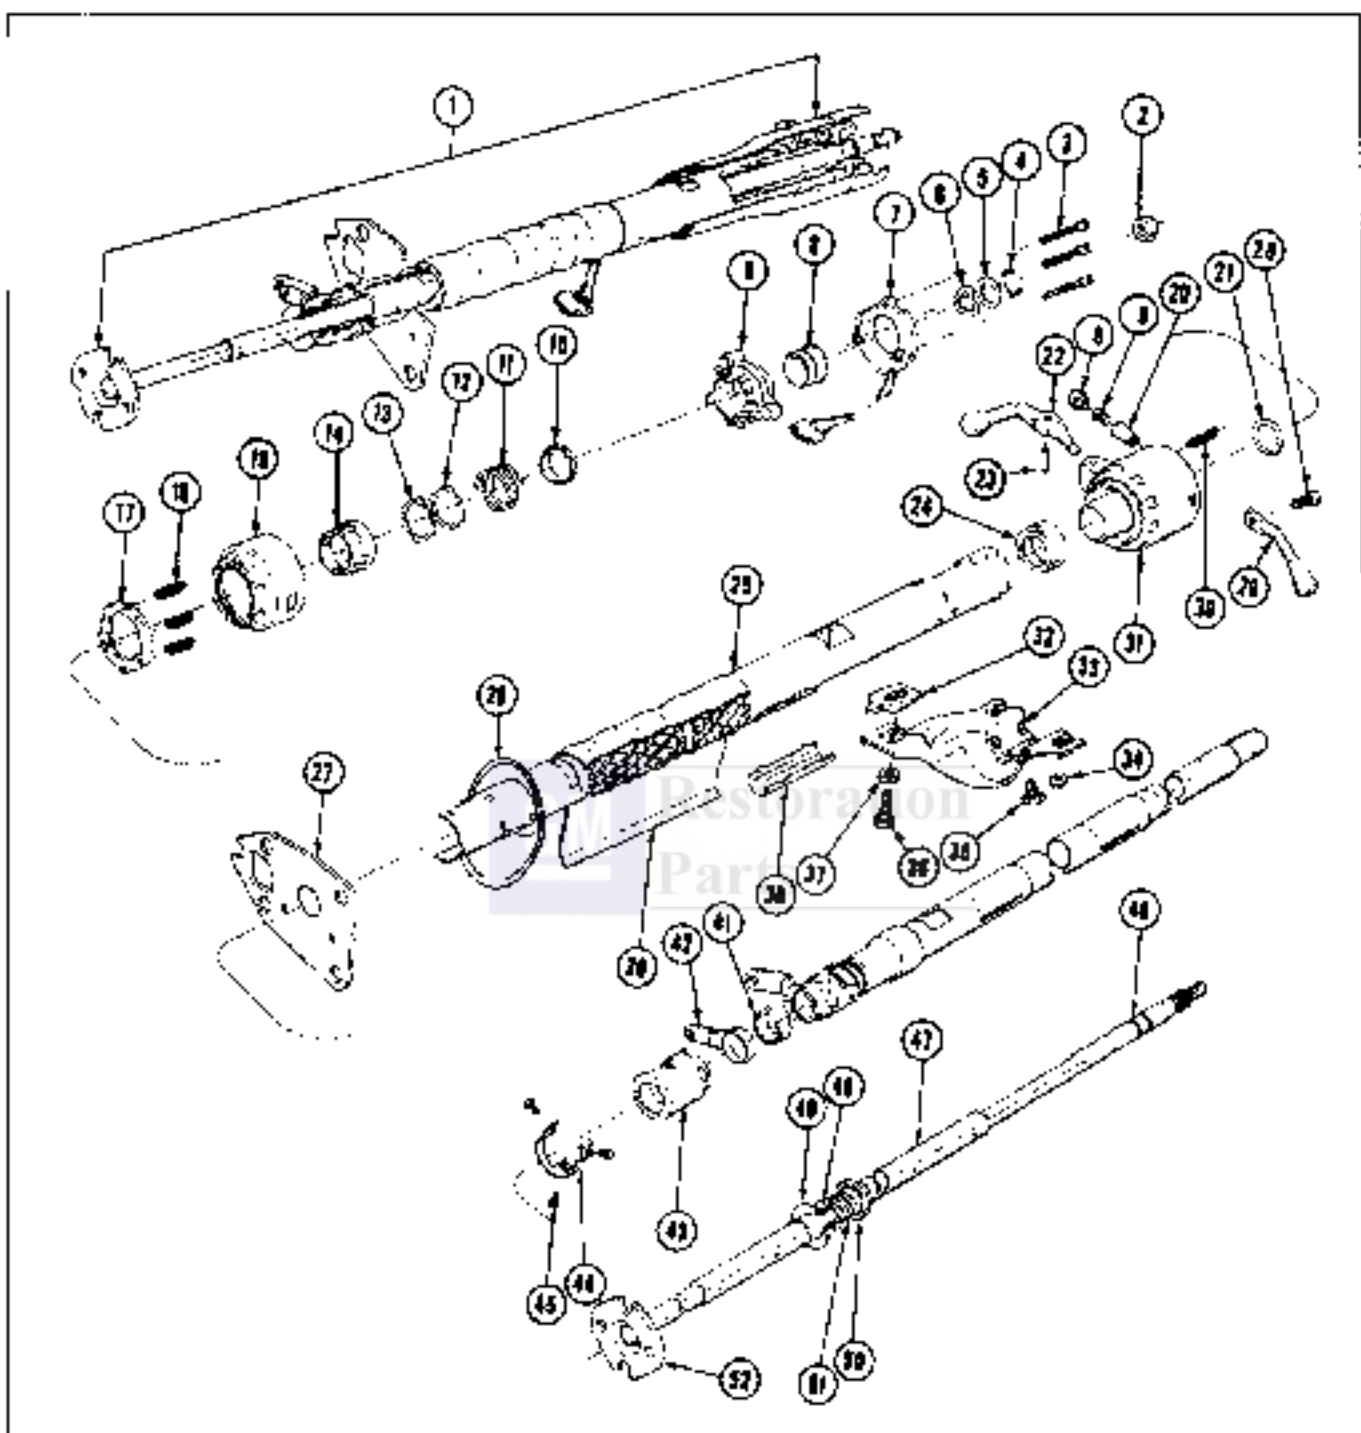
Exploded View of Typical Regular Column - Standard Transmission
